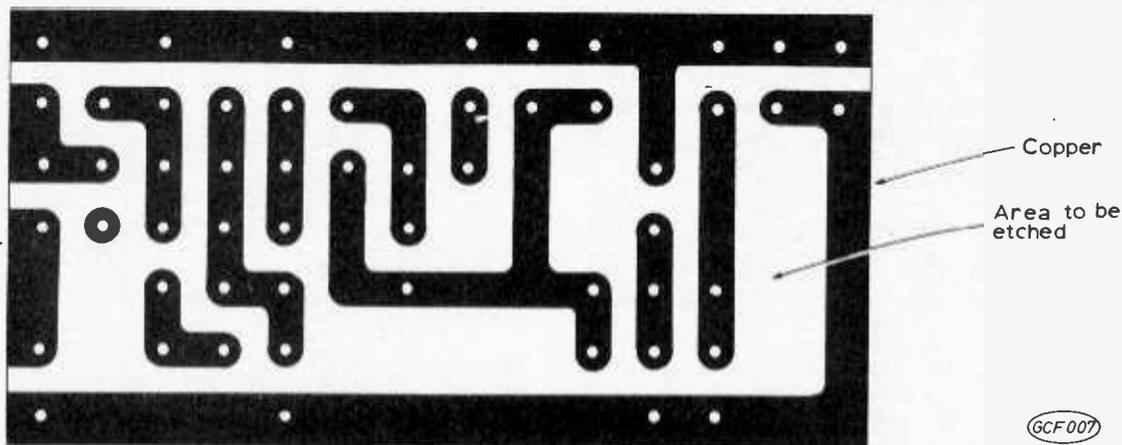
When the layout is finalised it must be reversed on to the board as shown here, complete with the holes required, drilled after etching.
